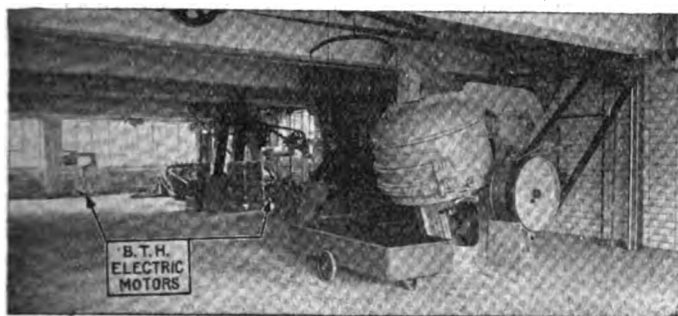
PIPE-VENTILATED MOTOR DRIVING KNEADING MACHINES, AUTOMATIC PLANT, &c.
